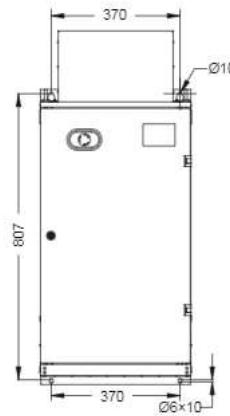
Positions and dimensions of the mounting holes on the back (in mm)
